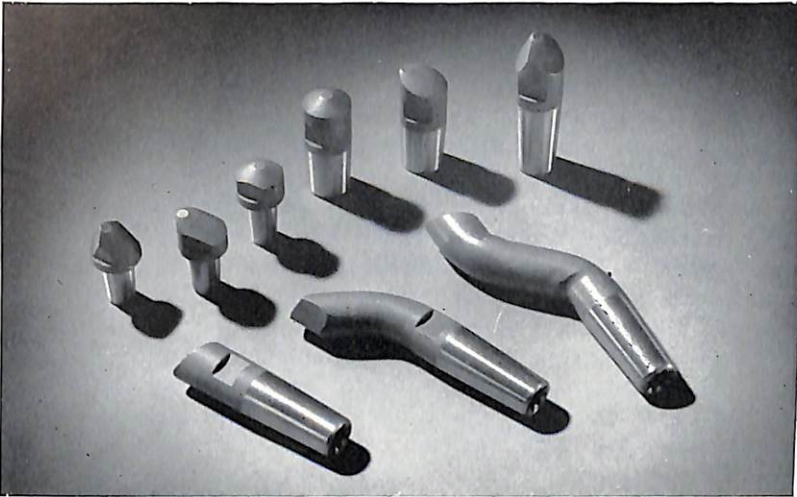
Spot welding electrodes machined from heat-treated chromium copper bar.
